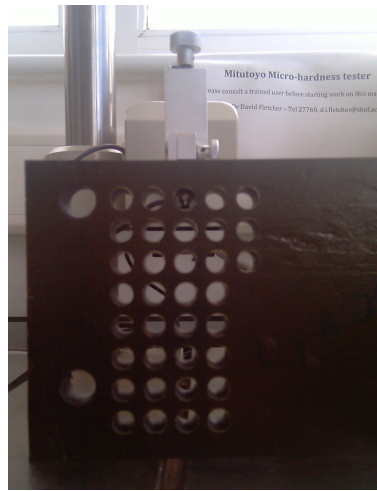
Surface Roughness Measurement of Drilled Holes
